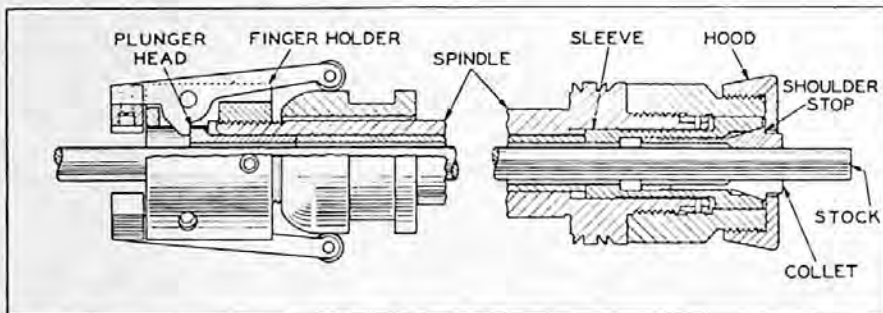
Stationary collet chuck grips successive parts with little variation in endwise location. Fitted sleeve introduces a sliding fit not used in collets (Figures 5A, 5B). This type chuck is not recommended for accurate radial location.
